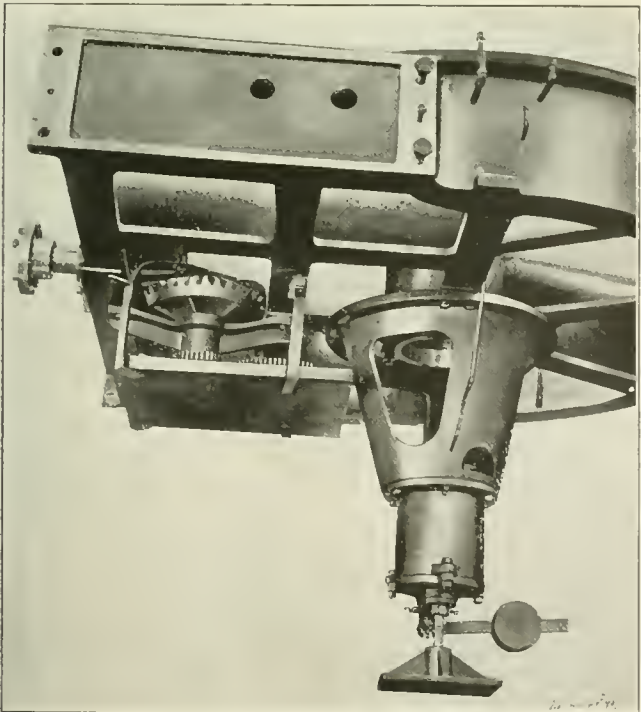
View showing Cone Brace, Adjustable Bushing for Main Spindle Bearing, and Automatic Adjustable Step Bearing
